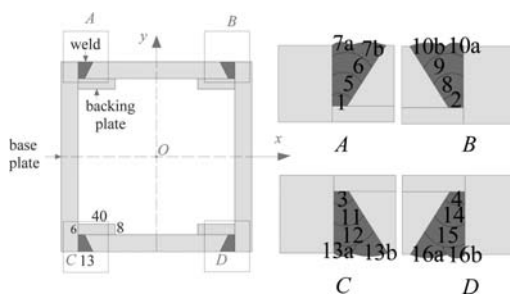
Cross section of the box section and the welding sequence of the box section.
